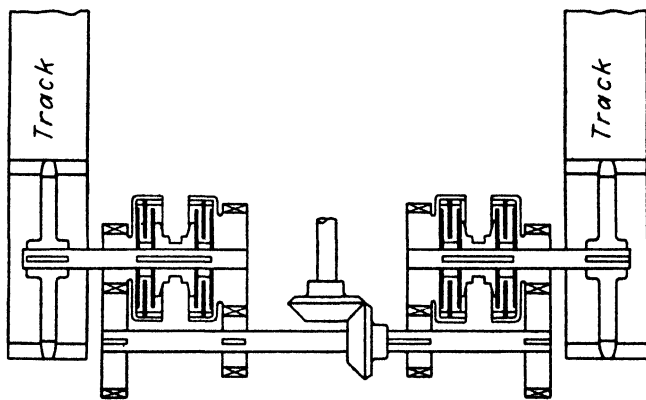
STEERING GEAR FOR HIGH-SPEED TRACKLAYERS.
